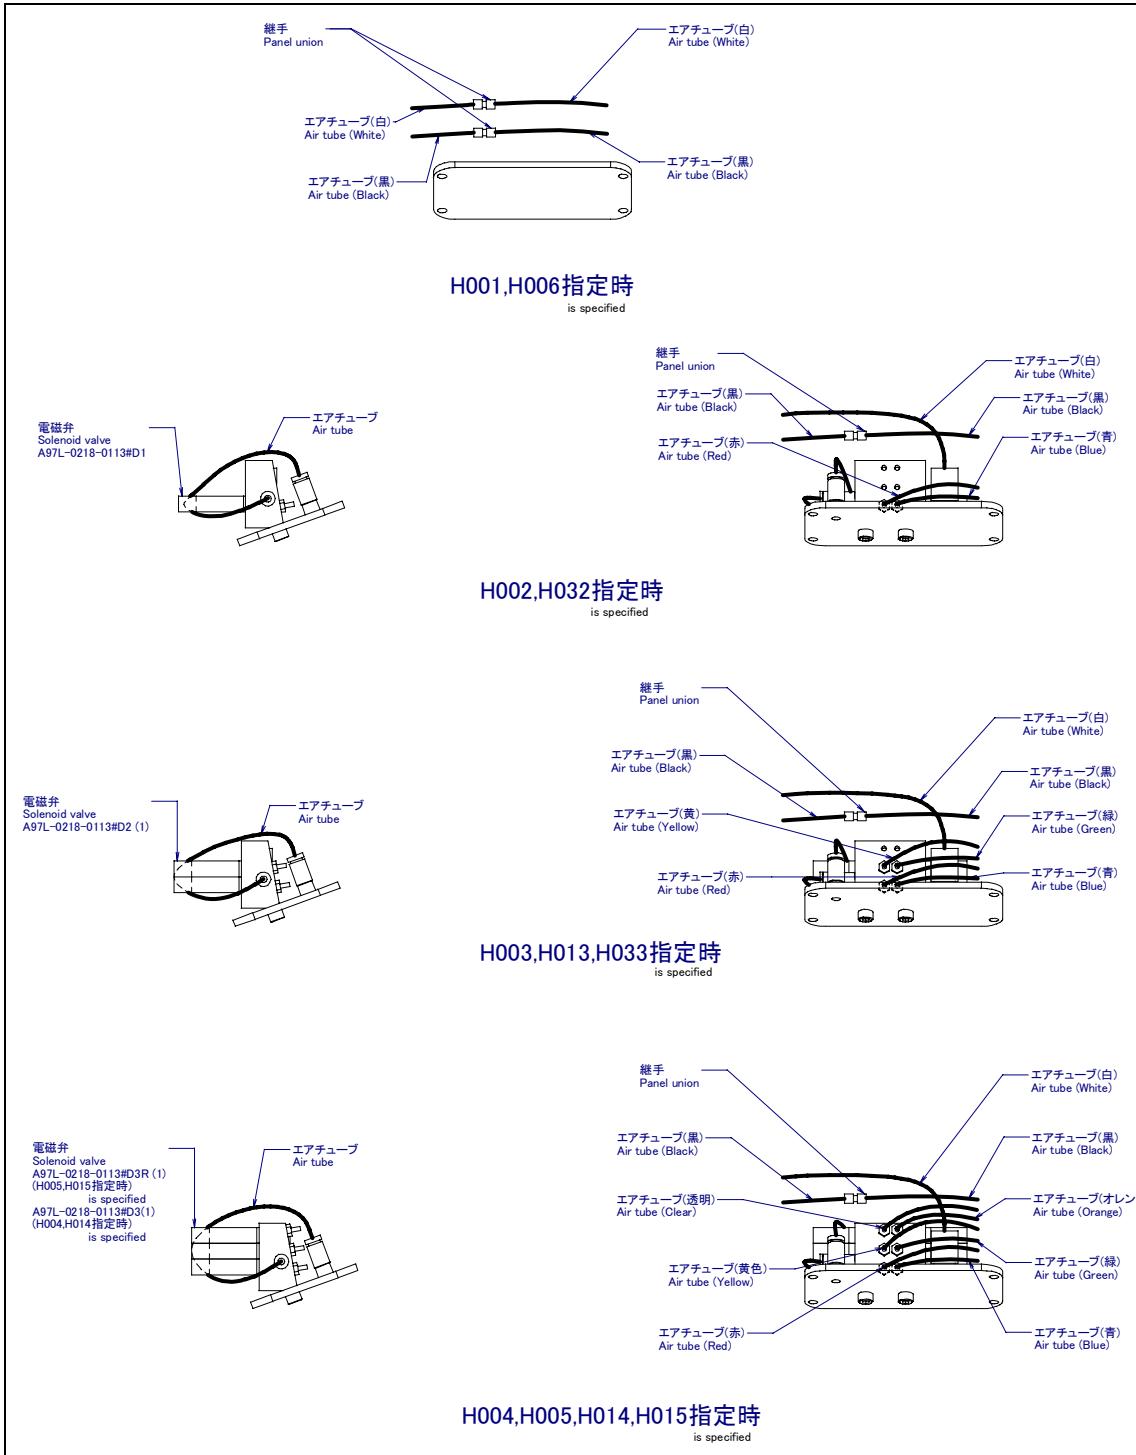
(i) Remove the air tube of solenoid valve part (LR Mate200iC, LR Mate200iC/5C,5WP,5H)
